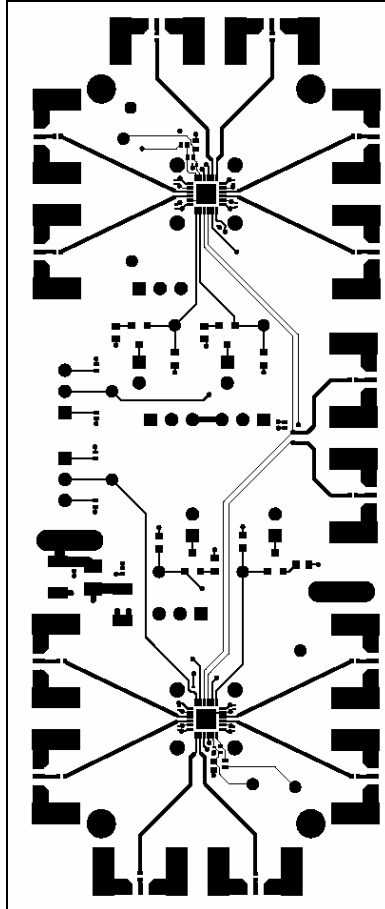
MAX3991/MAX3992 EV Kit PC Board Layout—Component Side
